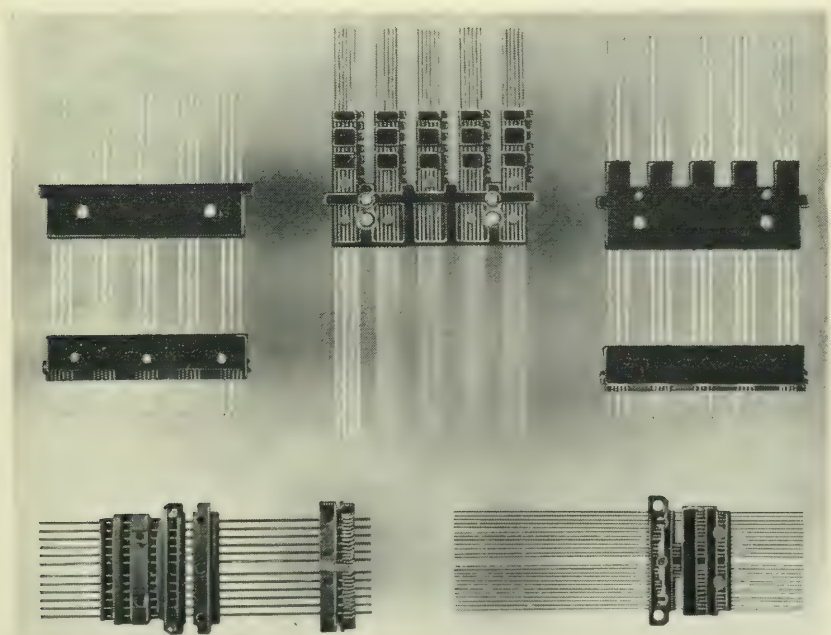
Wire block assemblies as manufactured for wire spring relays.
